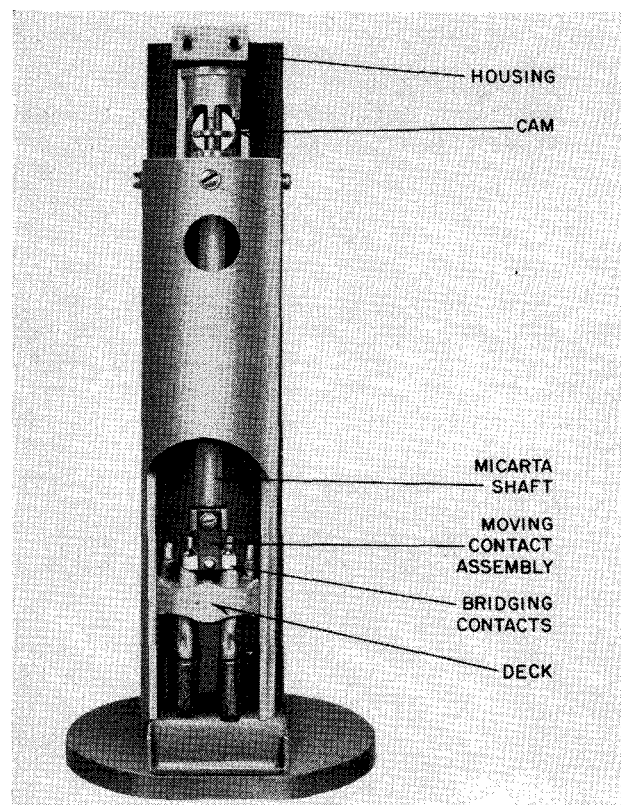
Cutaway View of Single Deck, 100-Ampere, WSB Tap Changer.
